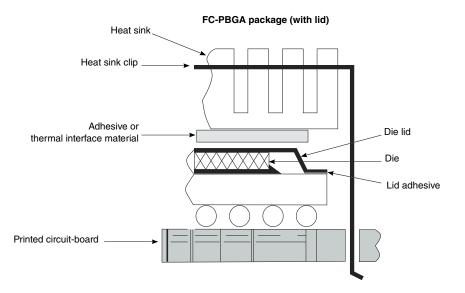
Package exploded, cross-sectional view-FC-PBGA (with lid)
